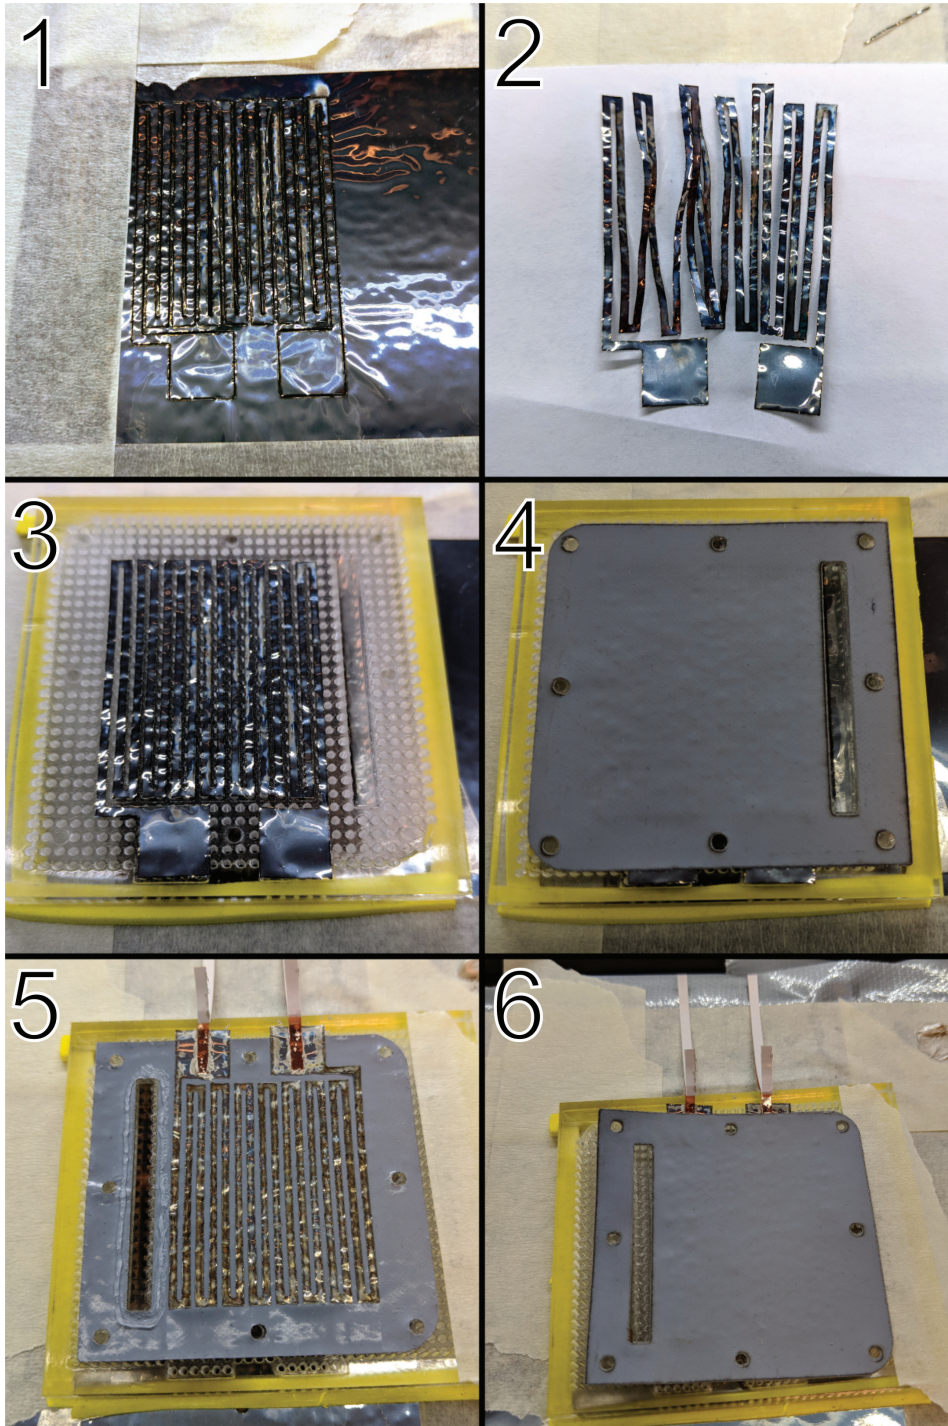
The most important steps of the heater production: 1) The laser cut NiCr foil; 2) The cut-out part transferred on a sheet of paper; 3) The cut-out part on the alignment tool; 4) And with the silicone foil in place; 5) The incomplete heater is turned upside down with the power connectors in place; 6) the second silicone foil is glued on, making one heating element complete.
